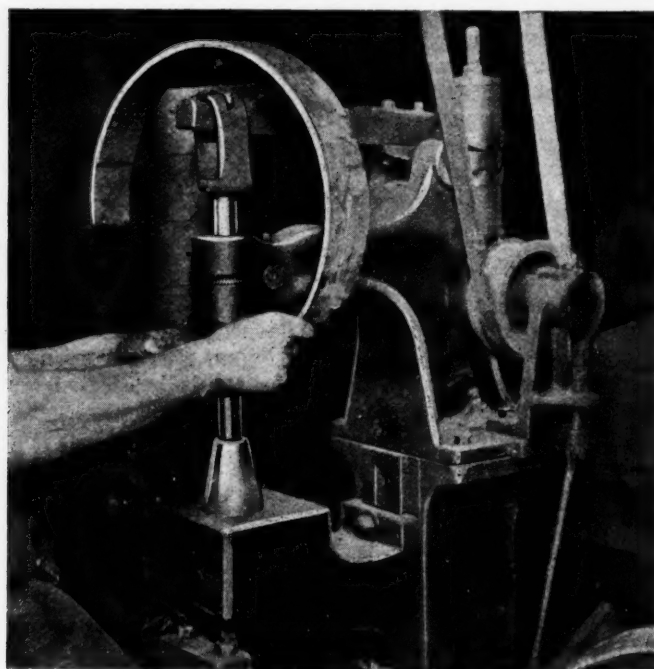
Riveting brackets that hold lever and link of an internal brake assembly
